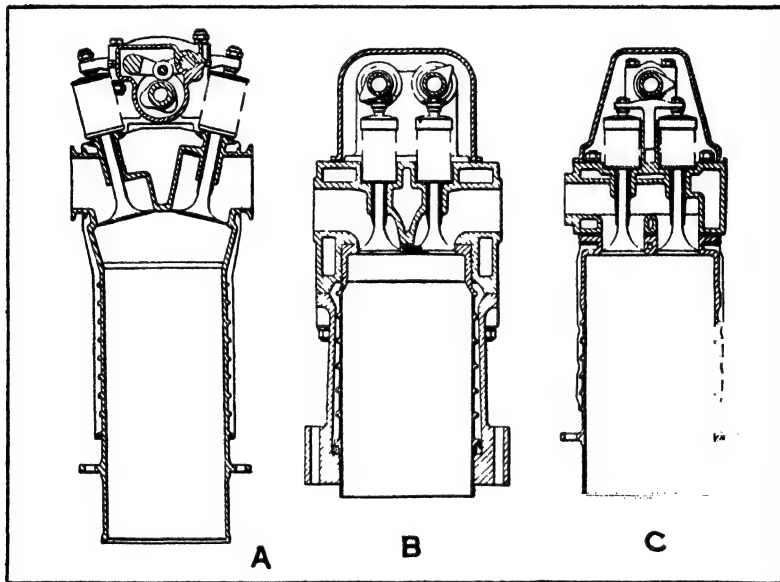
Forms of Cylinders Used in Practical Water-Cooled Aircraft Engines. A—Cylinder of Liberty Engine. B—Curtiss Wet Sleeve Construction. C—Packard Cylinder Construction.
